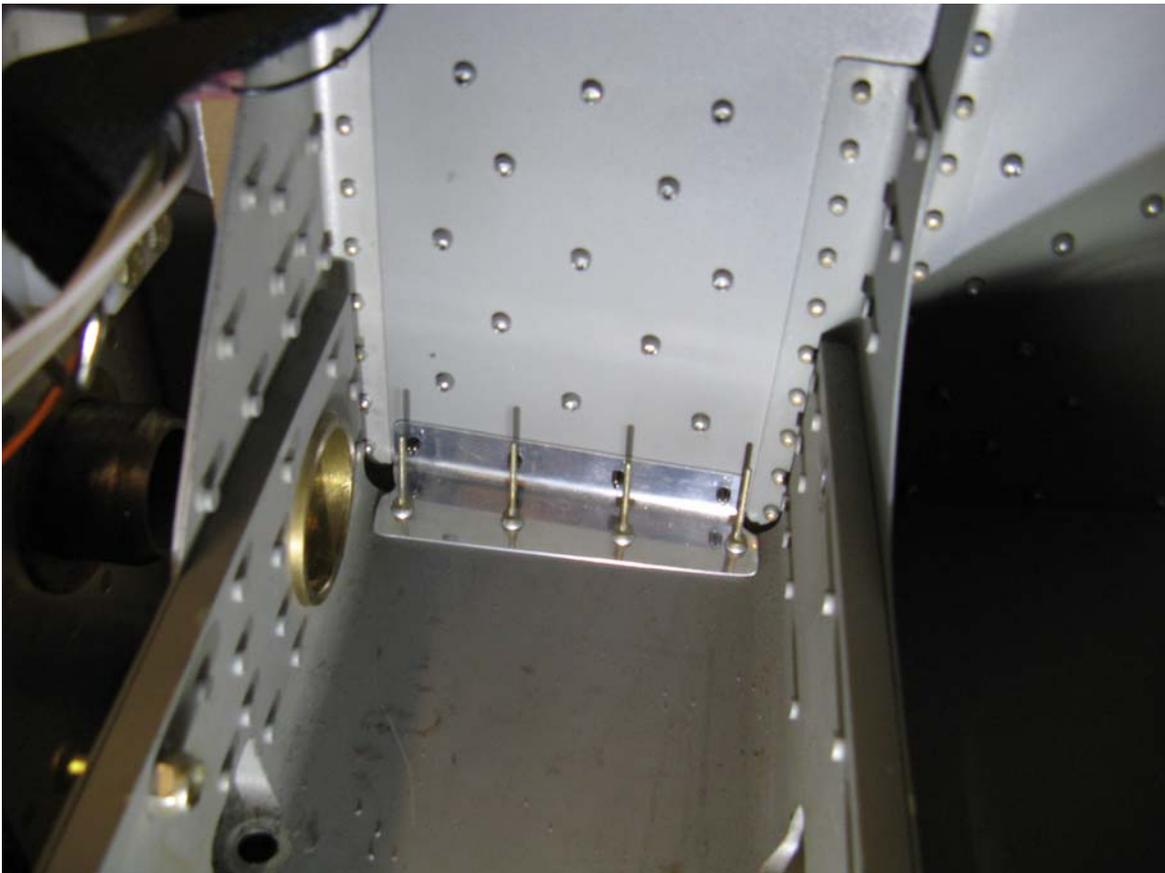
E: ATTACHING SKIN STIFFENER ANGLES TO CENTER SECTION CHANNEL USING CHERRYMAX CR32XX RIVETS
